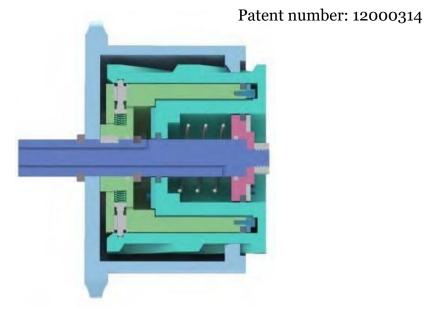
B is a mid-cut view of a patented variable value timing mechanism system utilizing engine oil for cam phasing.
